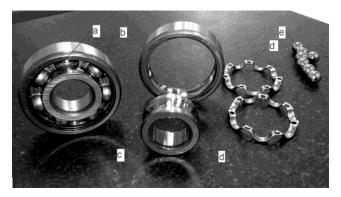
Example of the examined type 6304 ball bearing(a) Assembled bearing, (b) Outer ring, (c) Inner ring, (d) Cage and (e) Steel balls.
